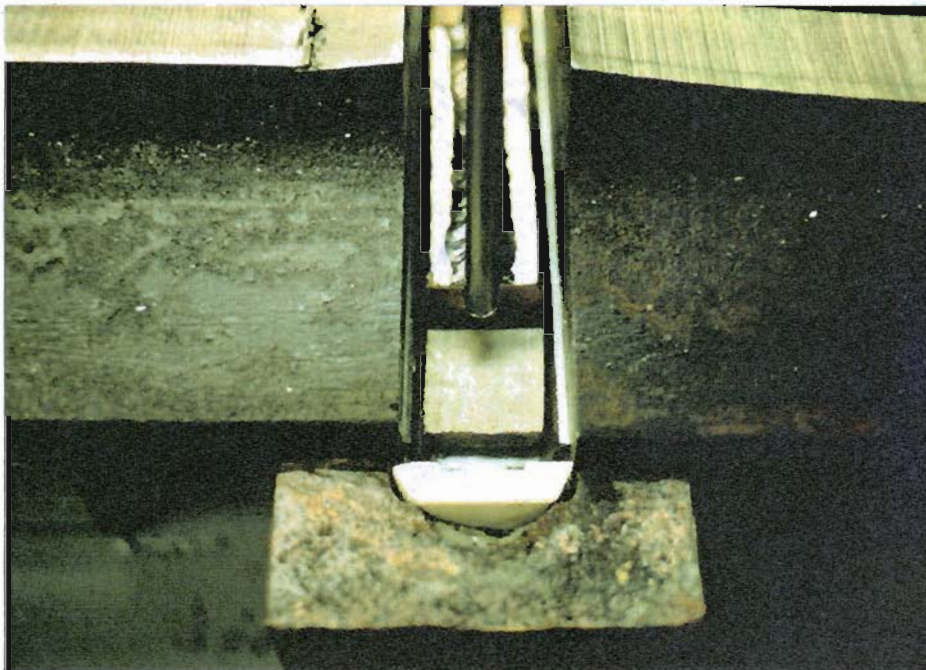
MOLD AND WELD SET-UP FOR EVALUATION OF THE GUIDE TUBE INFLUENCE UPON WELD STARTING.
